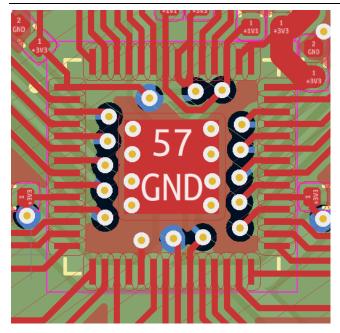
A section of the PCB Design showing vias placed in RP2040 footprint.
